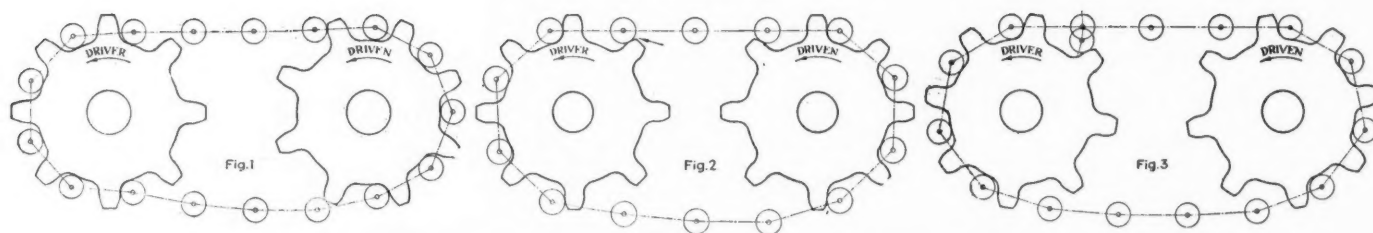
Old tooth form. Pitch of chain too small. Proper action on follower impossible. Pitch line clearance greater than necessary for driver. Fig. 2—Old tooth form. Chain pitch length too great. Clearance not sufficient. Fig. 3—Old tooth form. Chain elongated. Clearance ample. When roller No. 1 is released No. 2 comes against the tooth with a snap. The motion of the sprocket will be jerky
